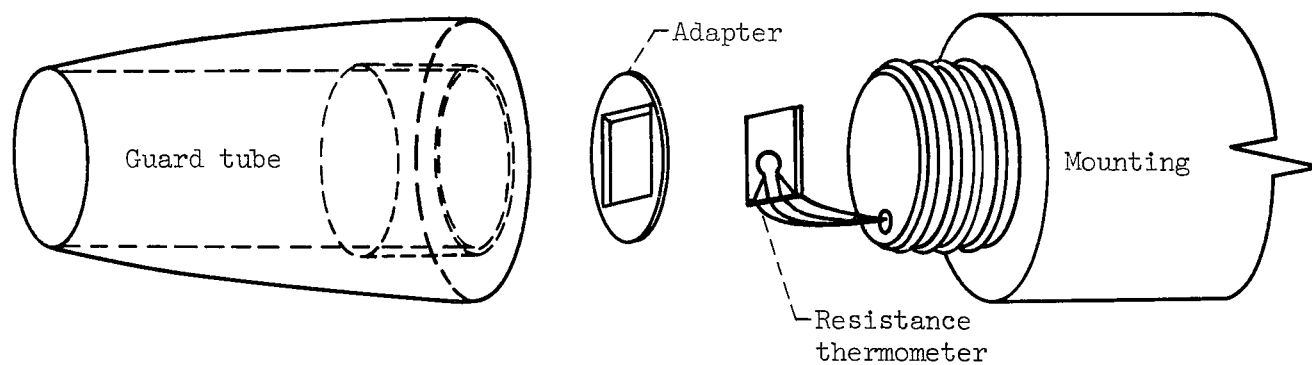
Schematic drawing of thin-film resistance thermometer and mounting.
